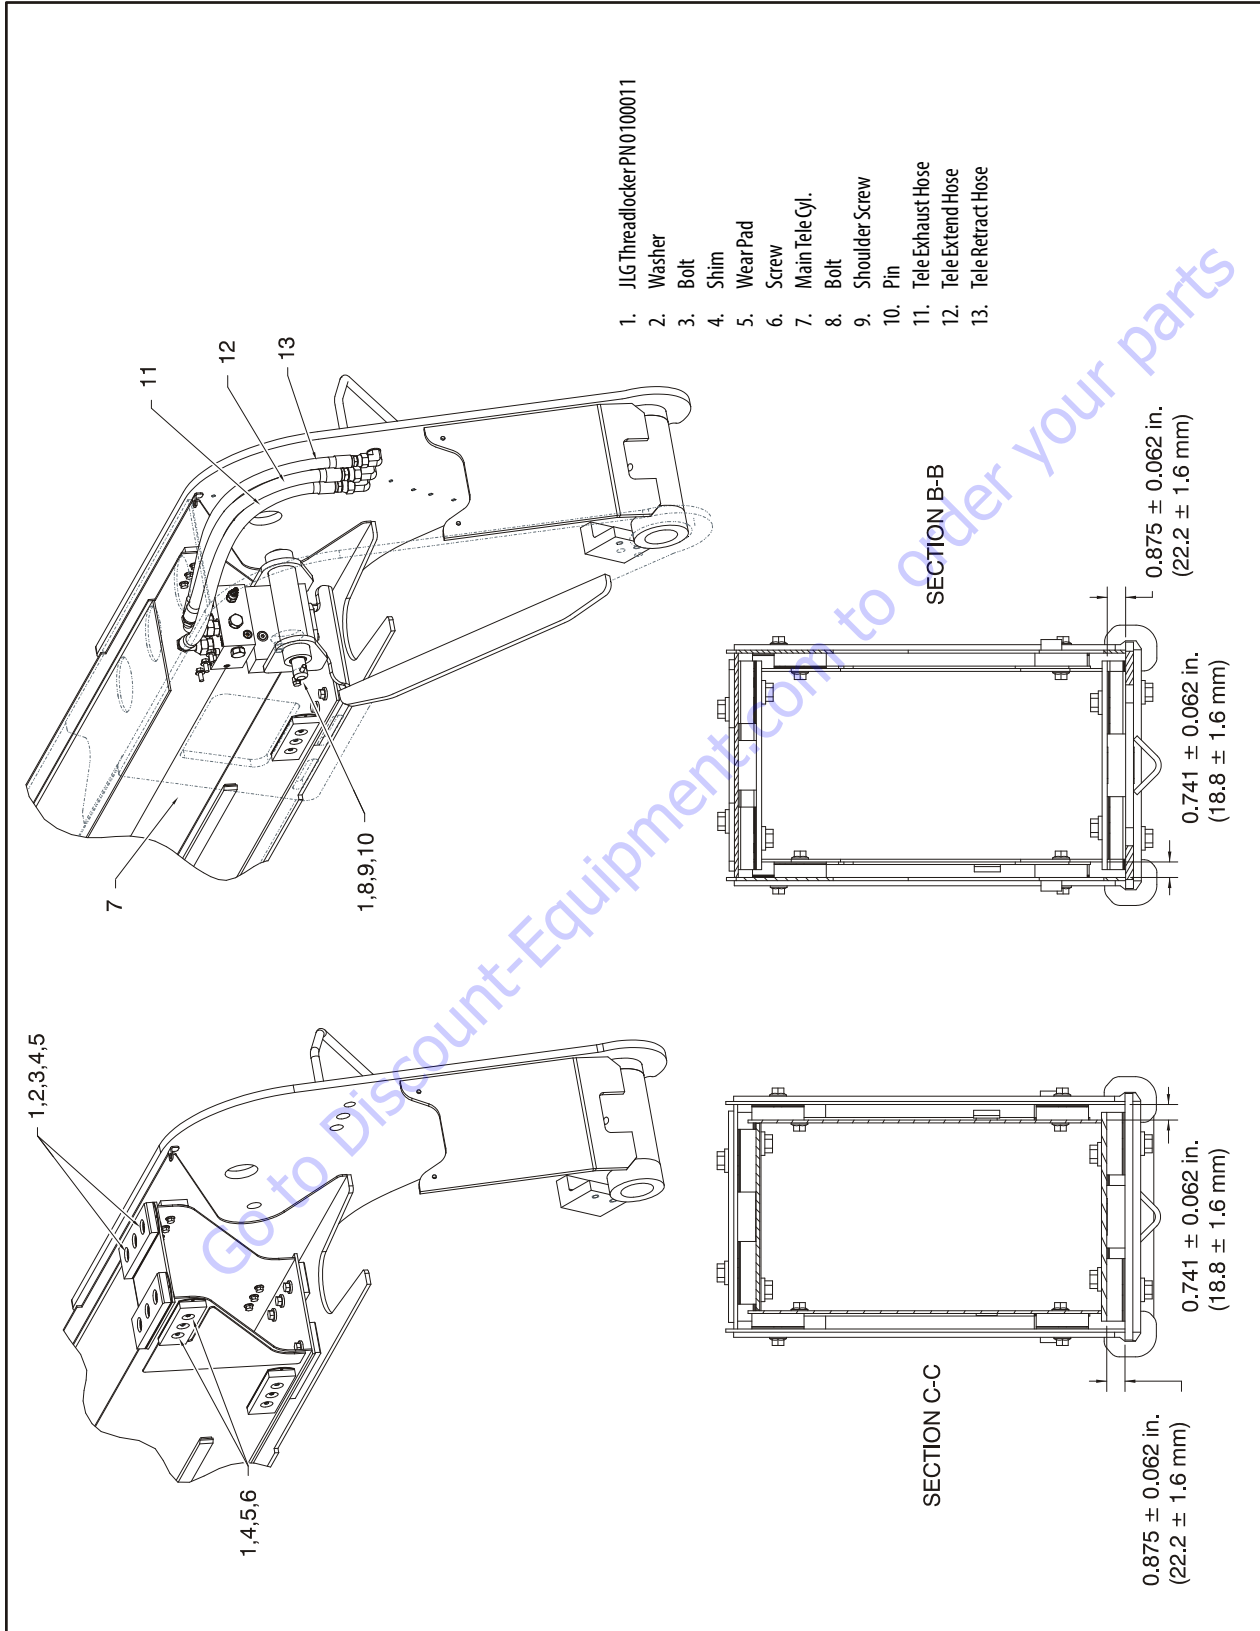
Main Boom Assembly - Sheet 2 of 4
